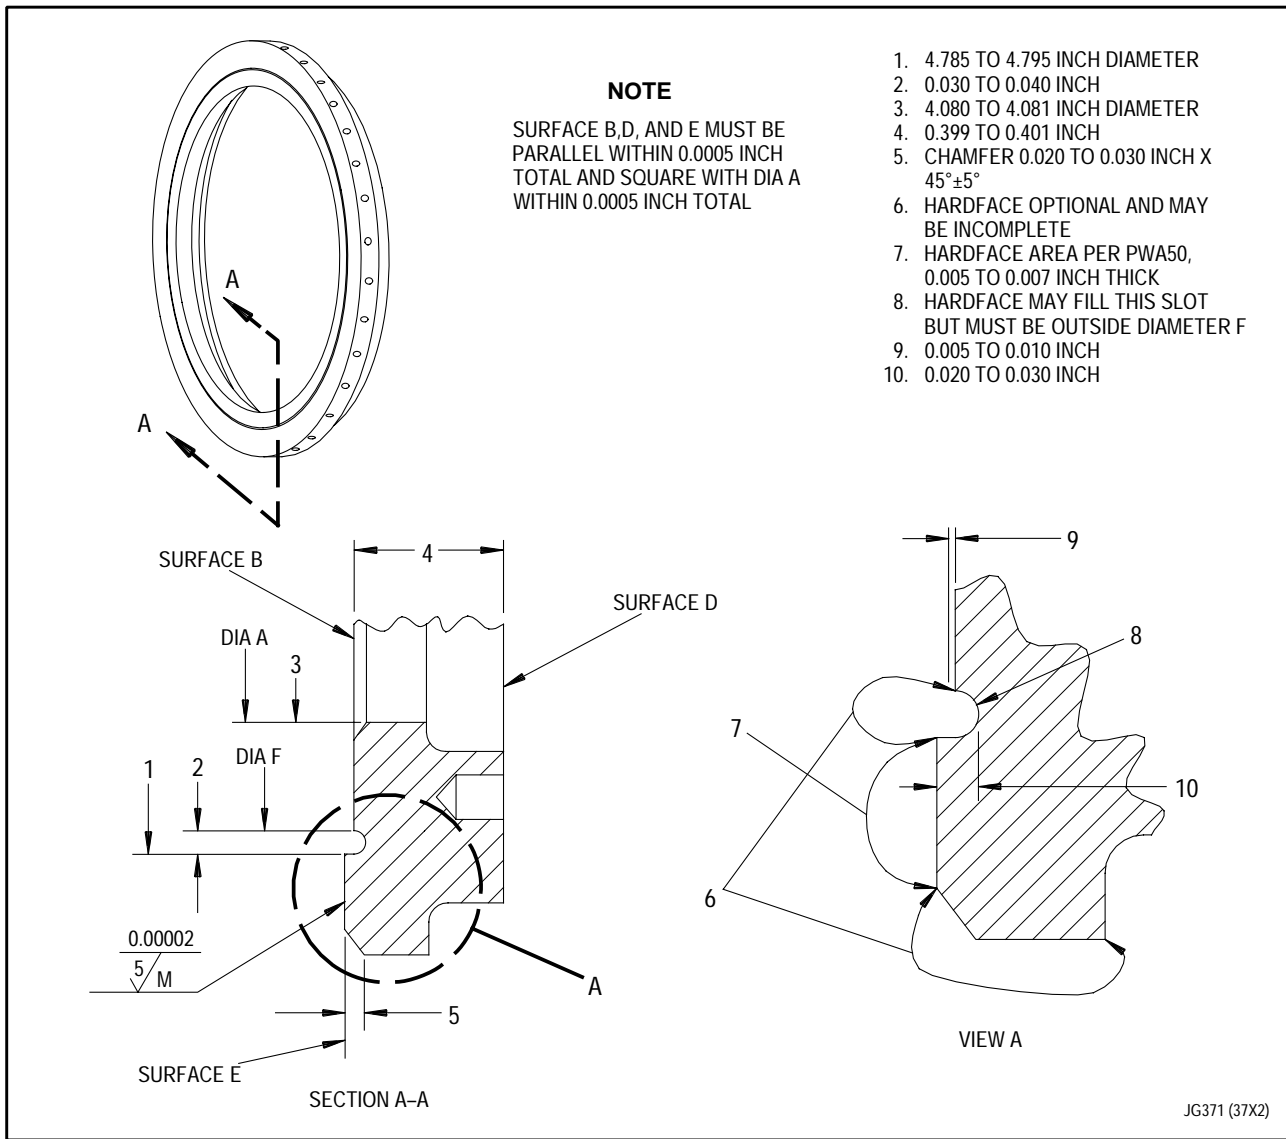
No. 2 Bearing Rear Seal Seat - Flame Deposition Coating and Lapping Repair (PN 4001528)
